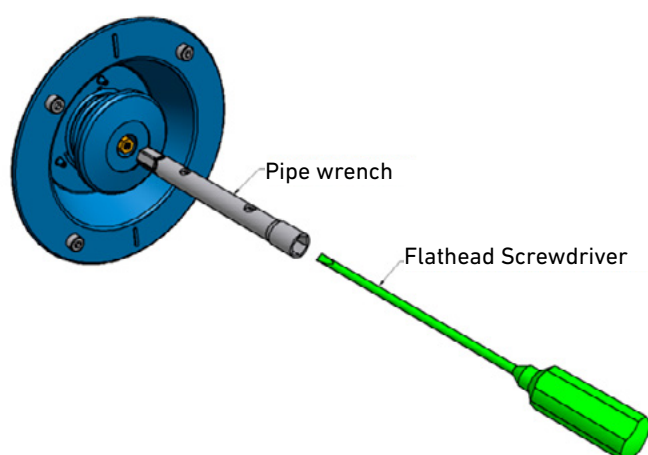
Exploded view of the tray + pipe wrench + screwdriver
